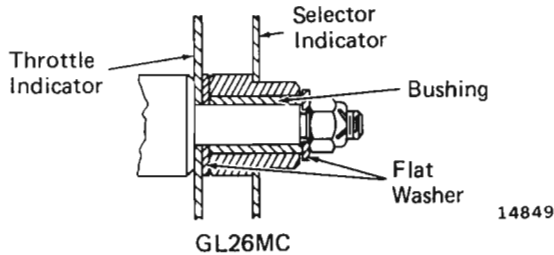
Removal Of Throttle And Selector Indicator Assembly
